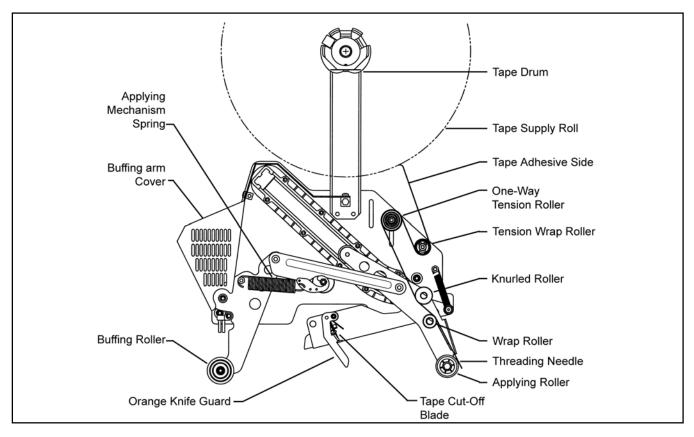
Taping Head Components and Threading Diagram, Upper Head (Left Side View)
